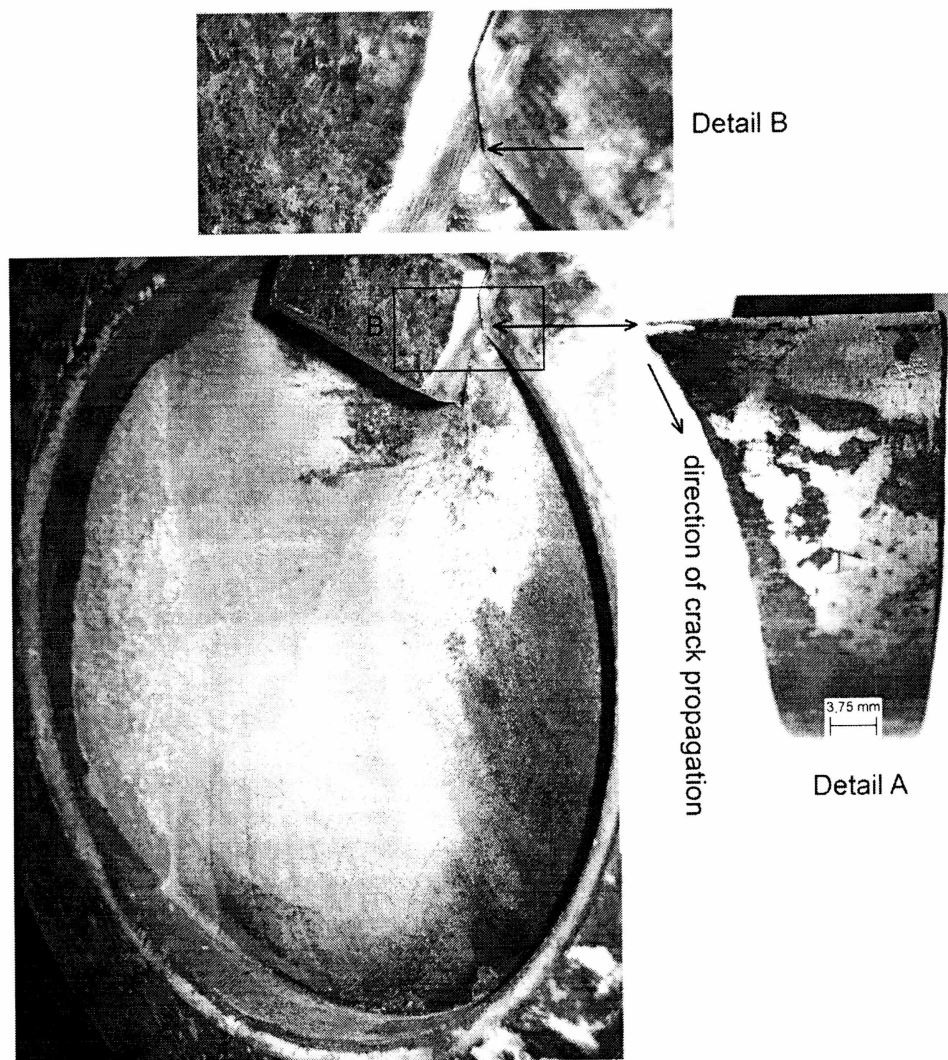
Geometric relation of the shaft fracture surface and the chain wheel hub.
